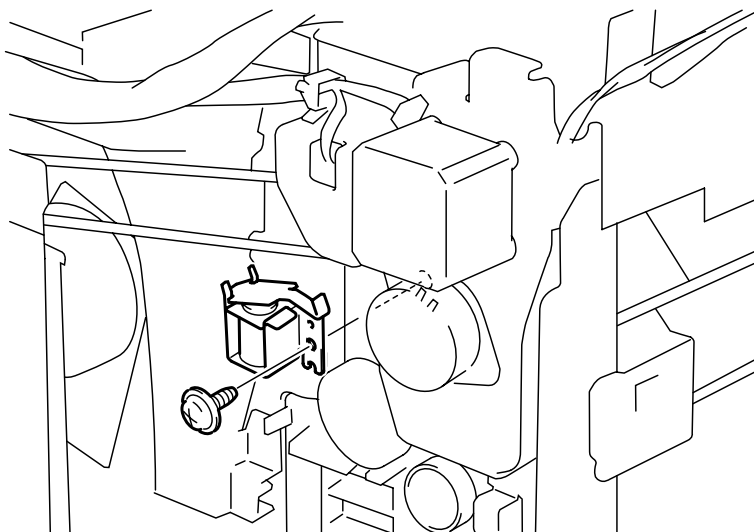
Removing the Cleaner Pressure Flapper Solenoid
